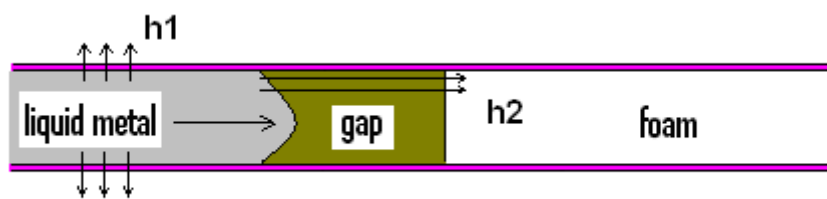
Heat transfer to the mould and to the foam from the molten metal is shown schematically.
